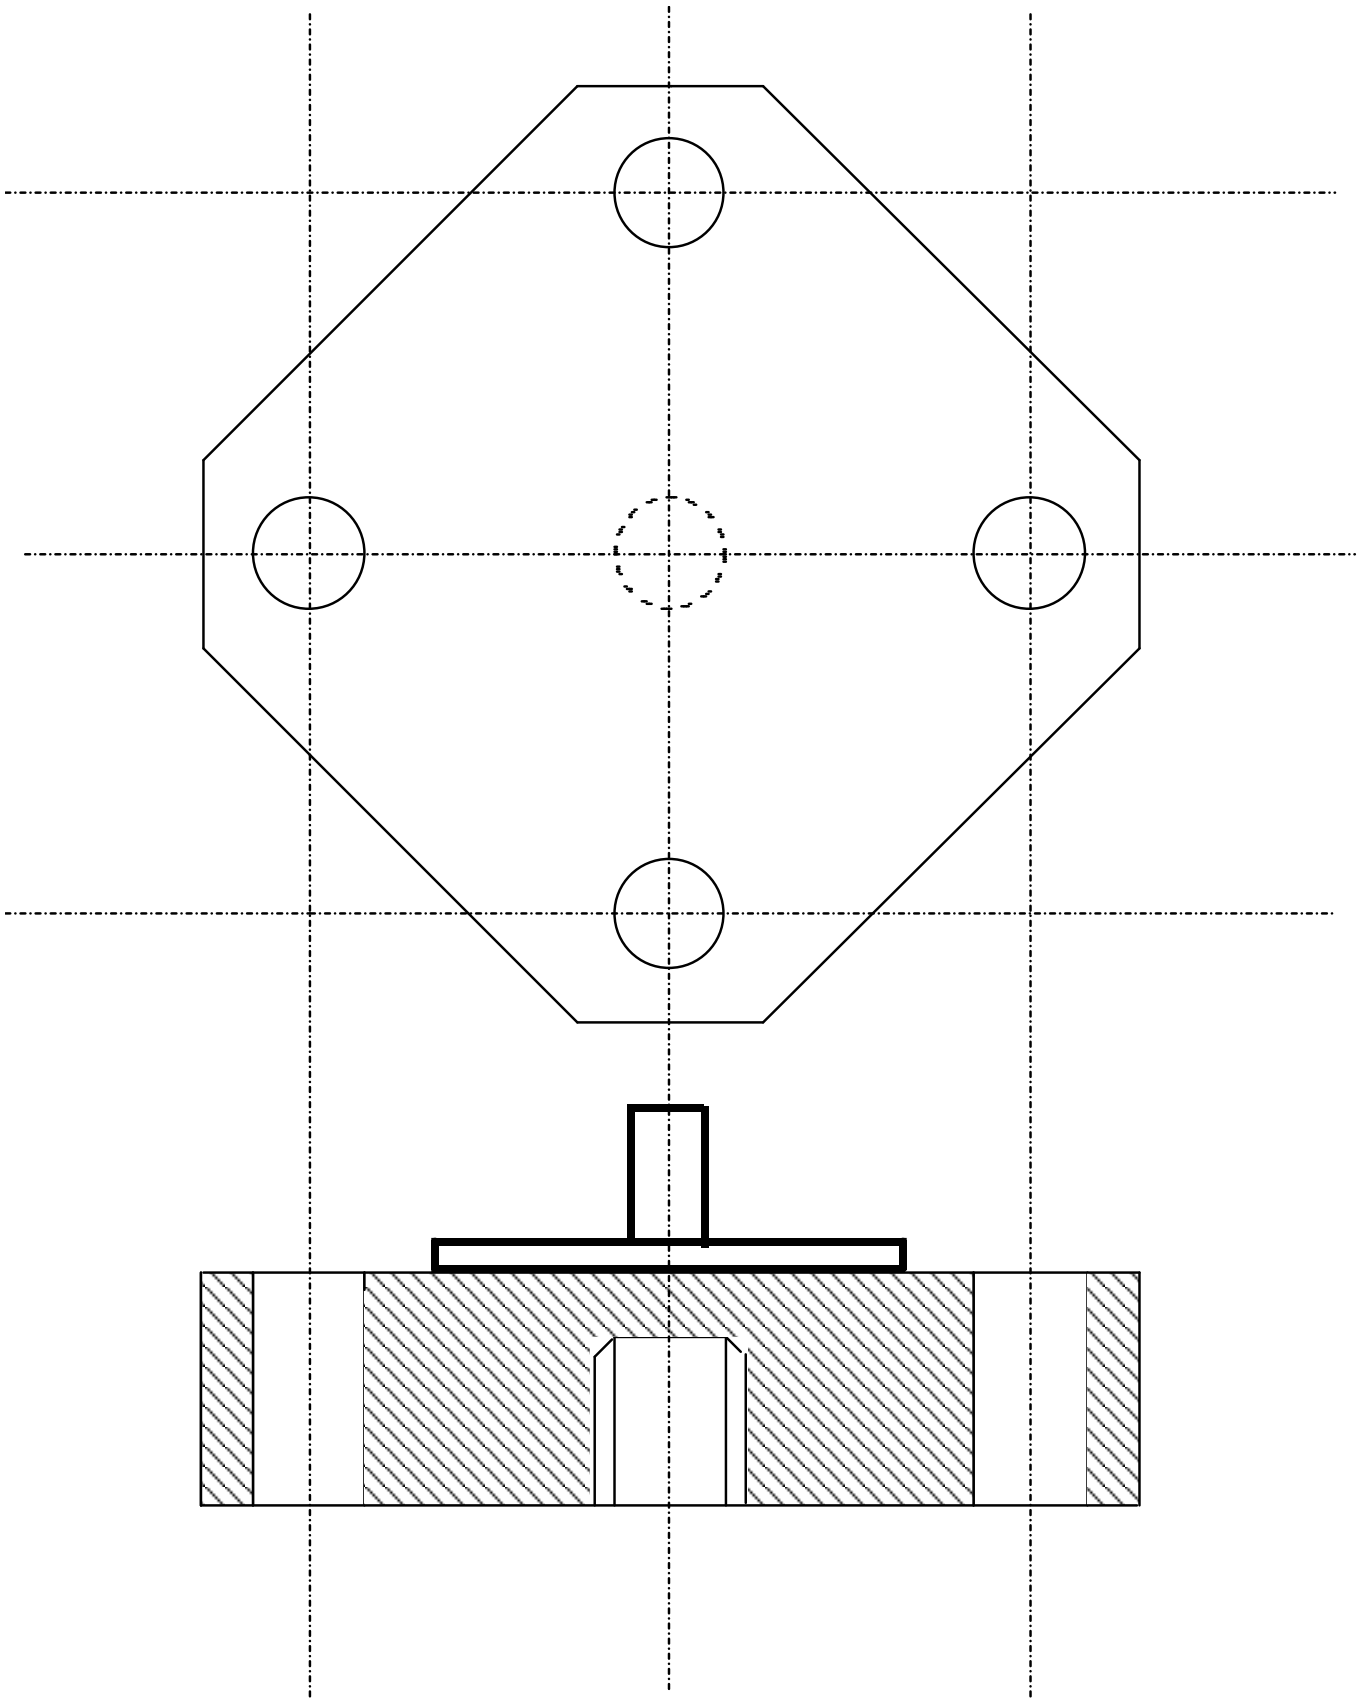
Schematic diagram of bottom side of fixing jig for plate side of specimen.
